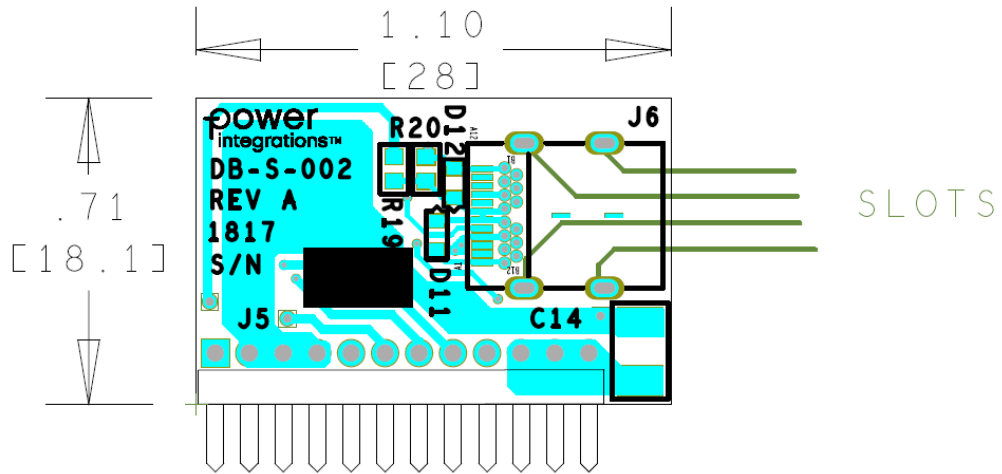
Printed Circuit Layout, Daughter board, Top.
